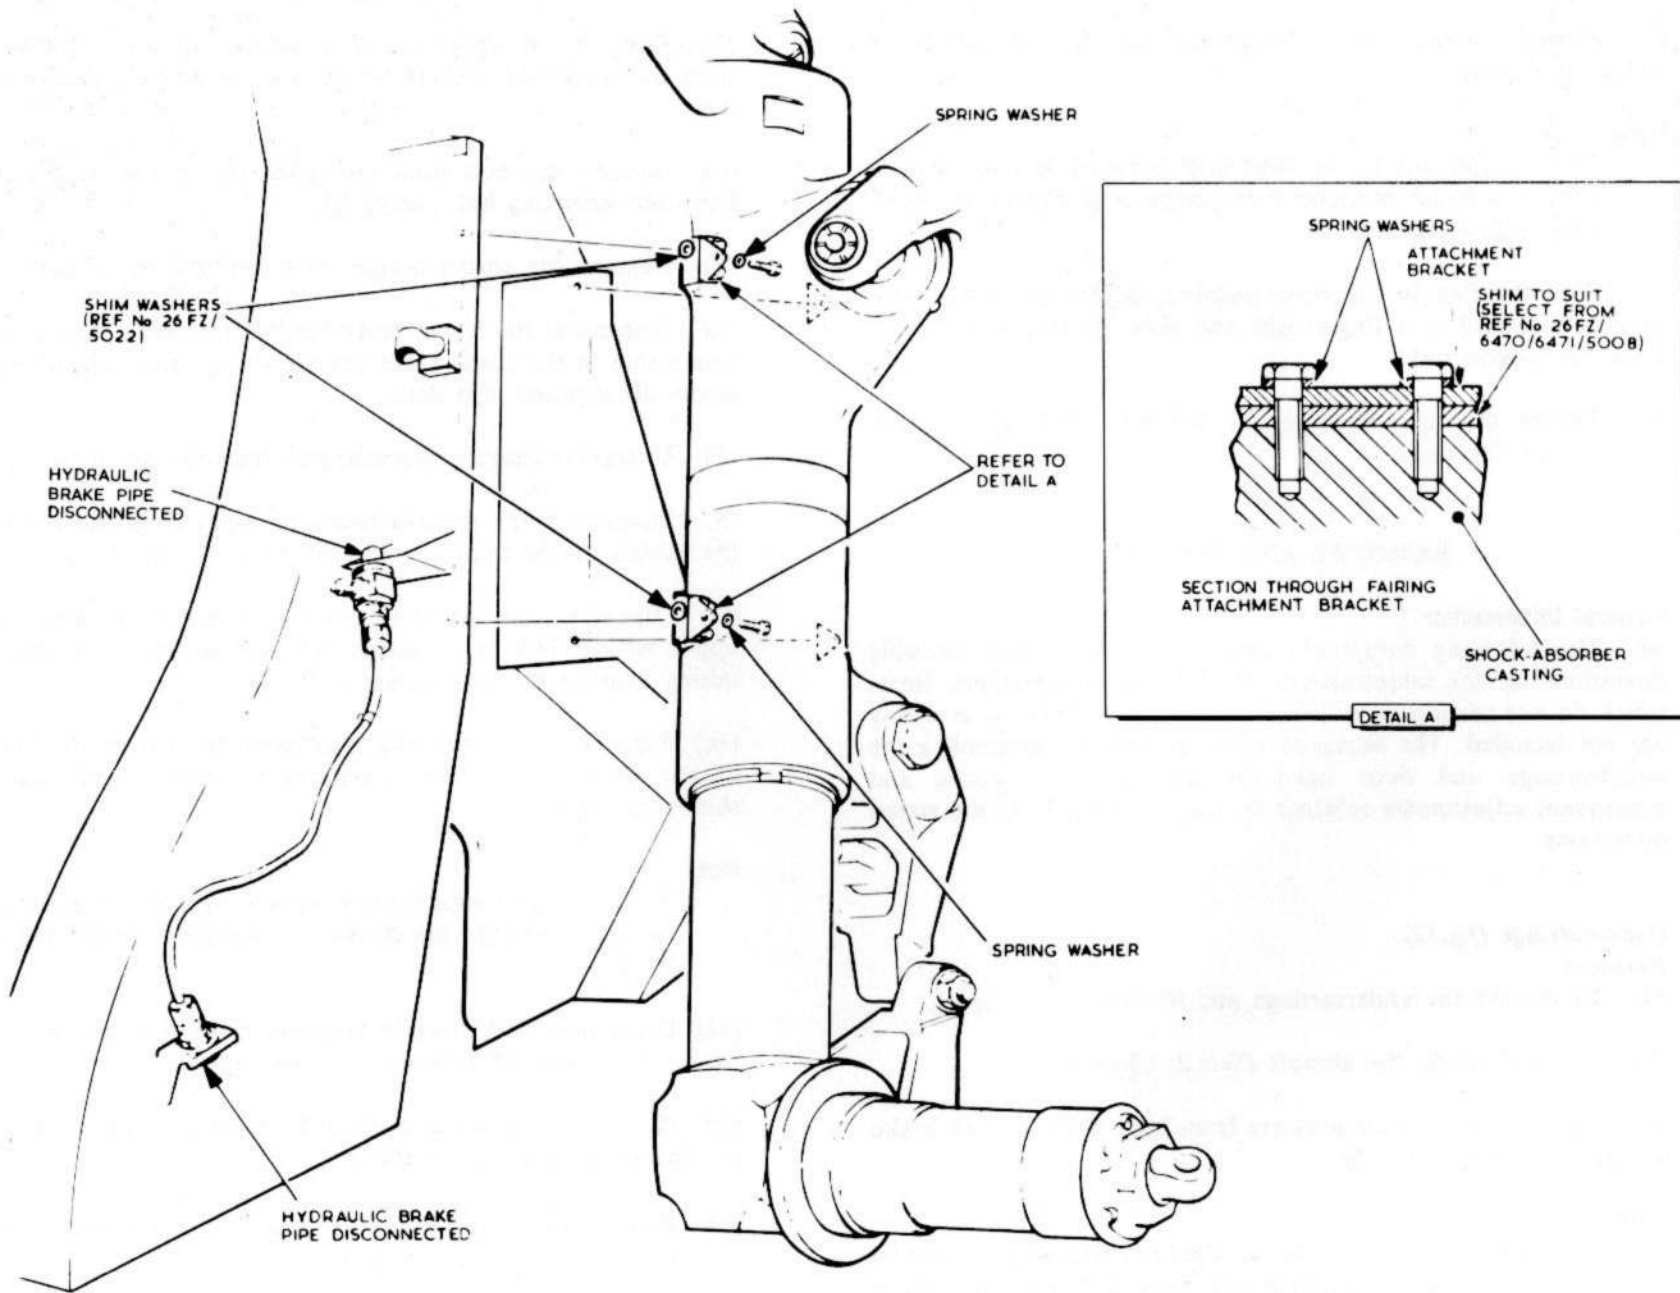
STRUT FAIRING - REMOVAL AND ASSEMBLY
